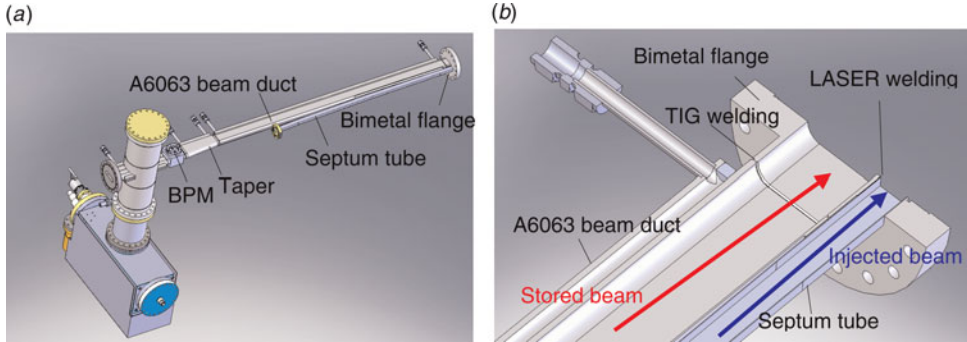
Schematic drawing (a) and cutaway view (b) of the TPS injection chamber.
